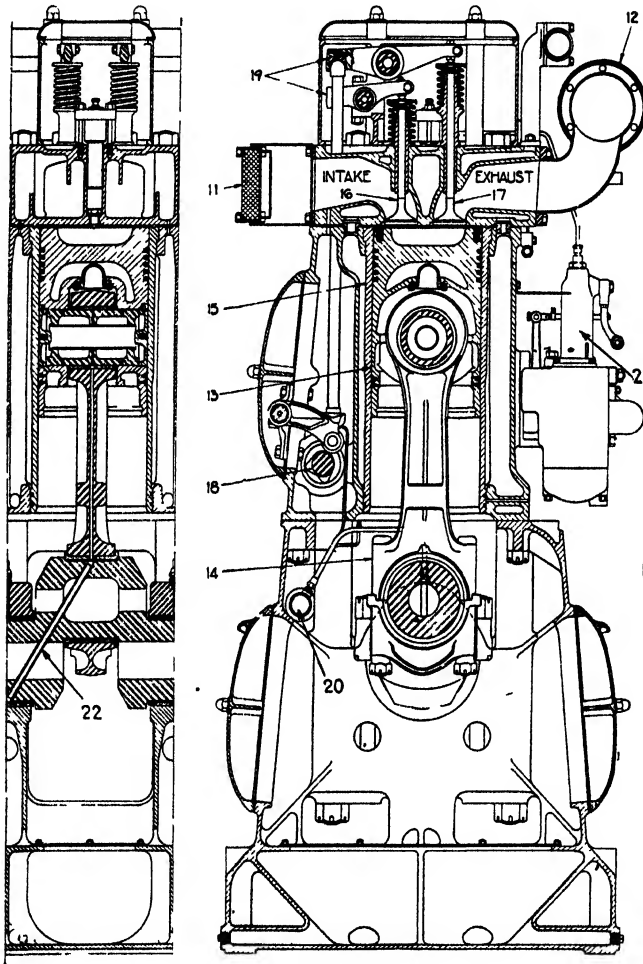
Cross sections through the Alco four-cycle Diesel. 11 = air intake filter; 12 = exhaust manifold; 13 = piston; 14 = connecting rod; 15 = liner; 16 = intake valves; 17 = exhaust valves; 18 = camshaft; 19 = valve rockers; 20 = lubricating-oil header; 21 = Bosch fuel pump; 22 = lubricating tube in shaft.
